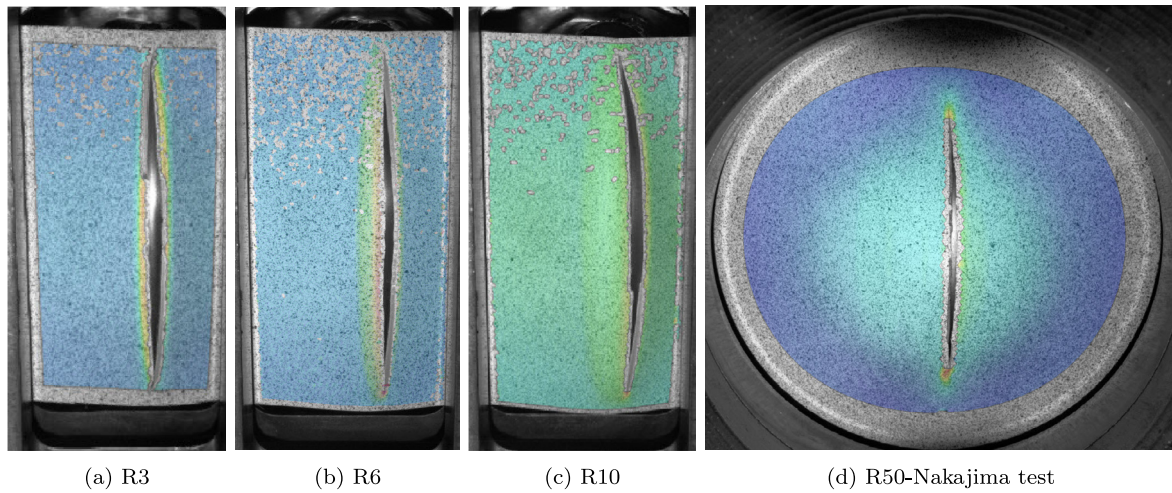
Fracture in DP800 specimens obtained from the stretch-bend tests.
